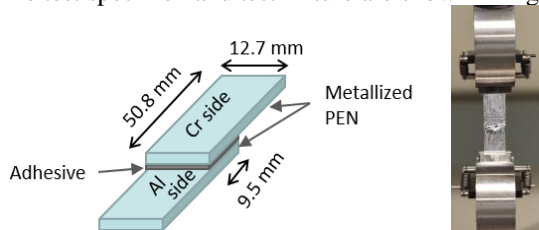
Lap shear test specimen of the seamed solar sail membrane.
